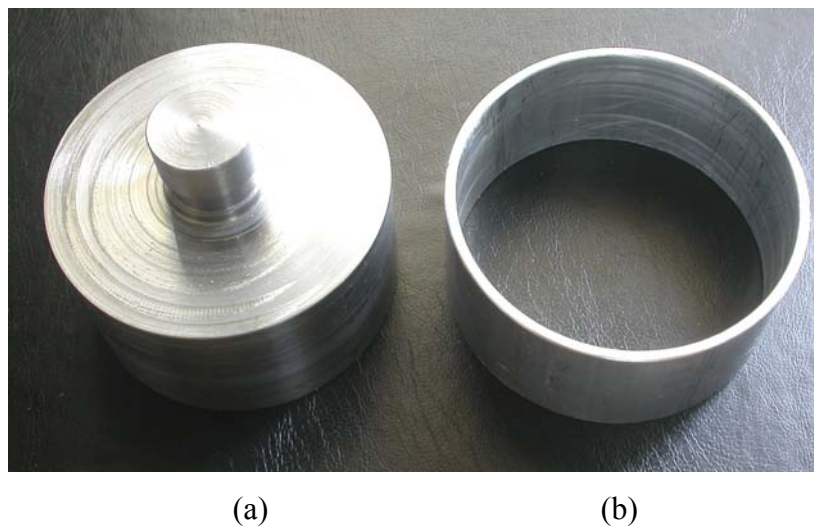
(a) Compression test apparatus for hexagonal packed tube bundles and (b) Al circular lateral constraint tube.
